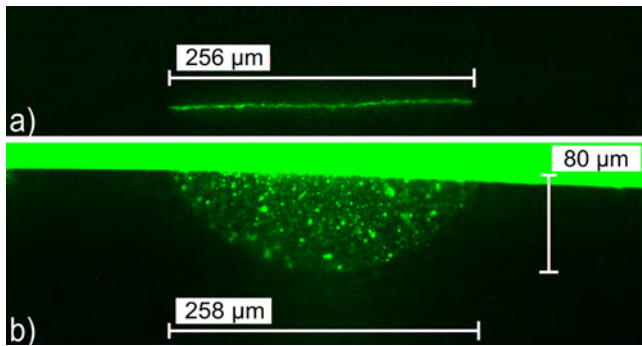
Crack shape determination in SNRef (HK7) with FPD and UV light. (a) Full crack width $2c$ measured at the original surface (before fracture) and (b) crack depth a and full crack width $2c$ measured at the fracture surface.
